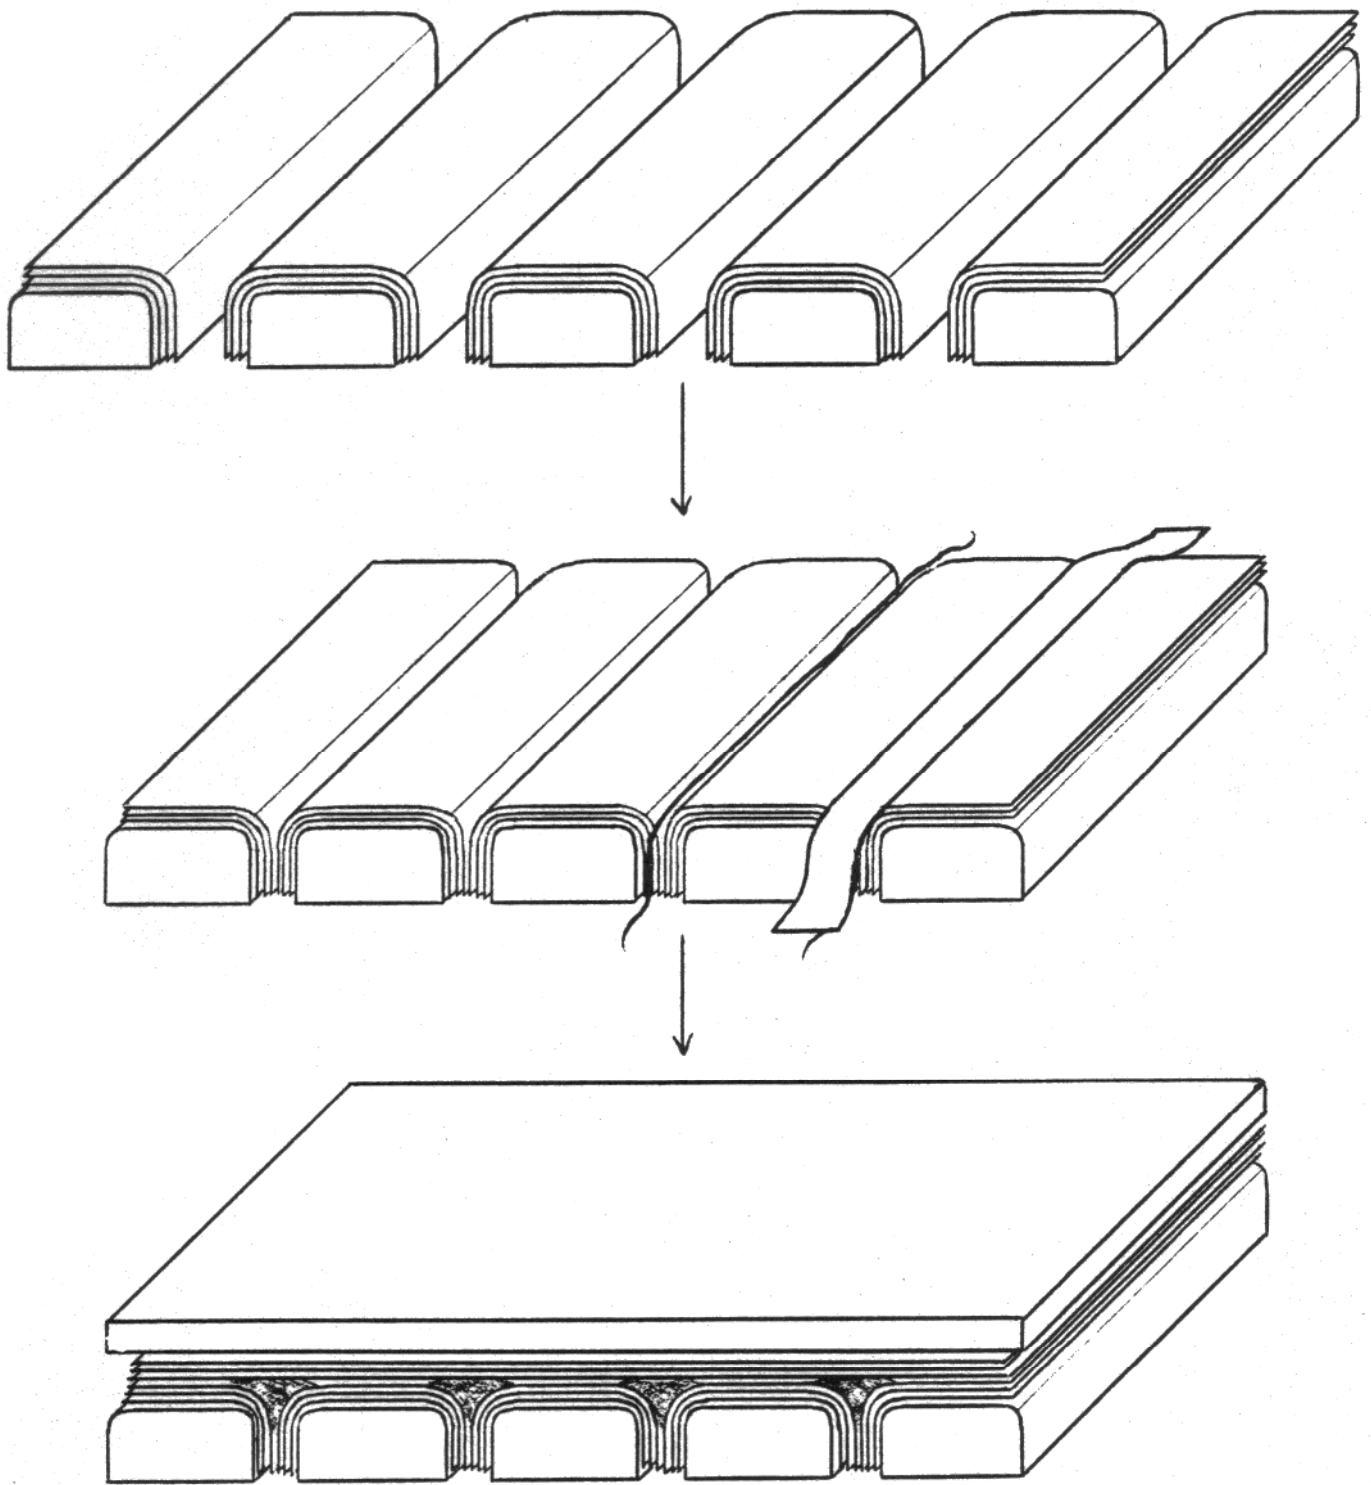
Lay-up of MSC Panels on Aluminum Tooling
